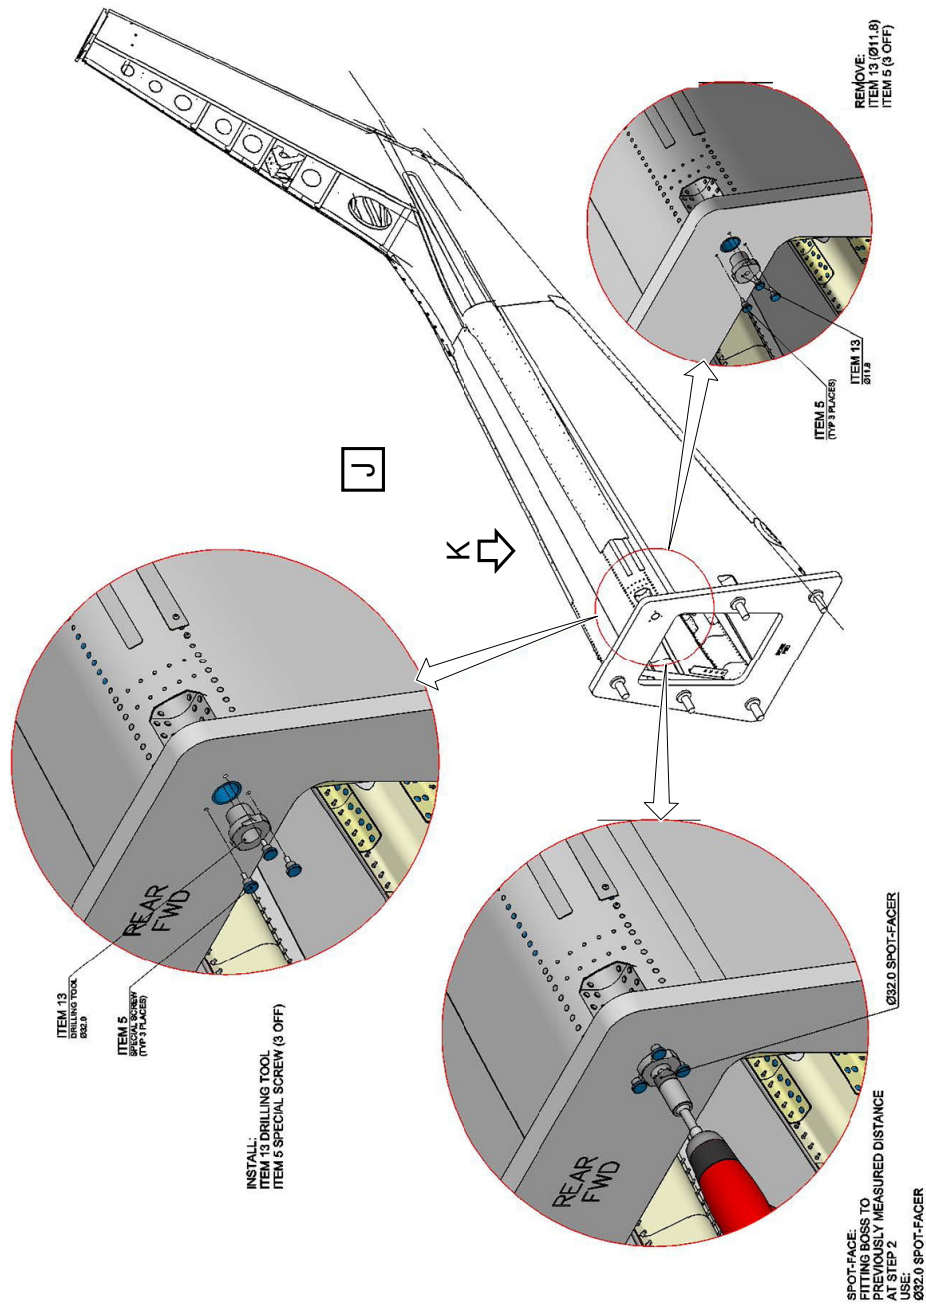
(Sheet 4 of 10) Use of the positioning and drilling tool kit
